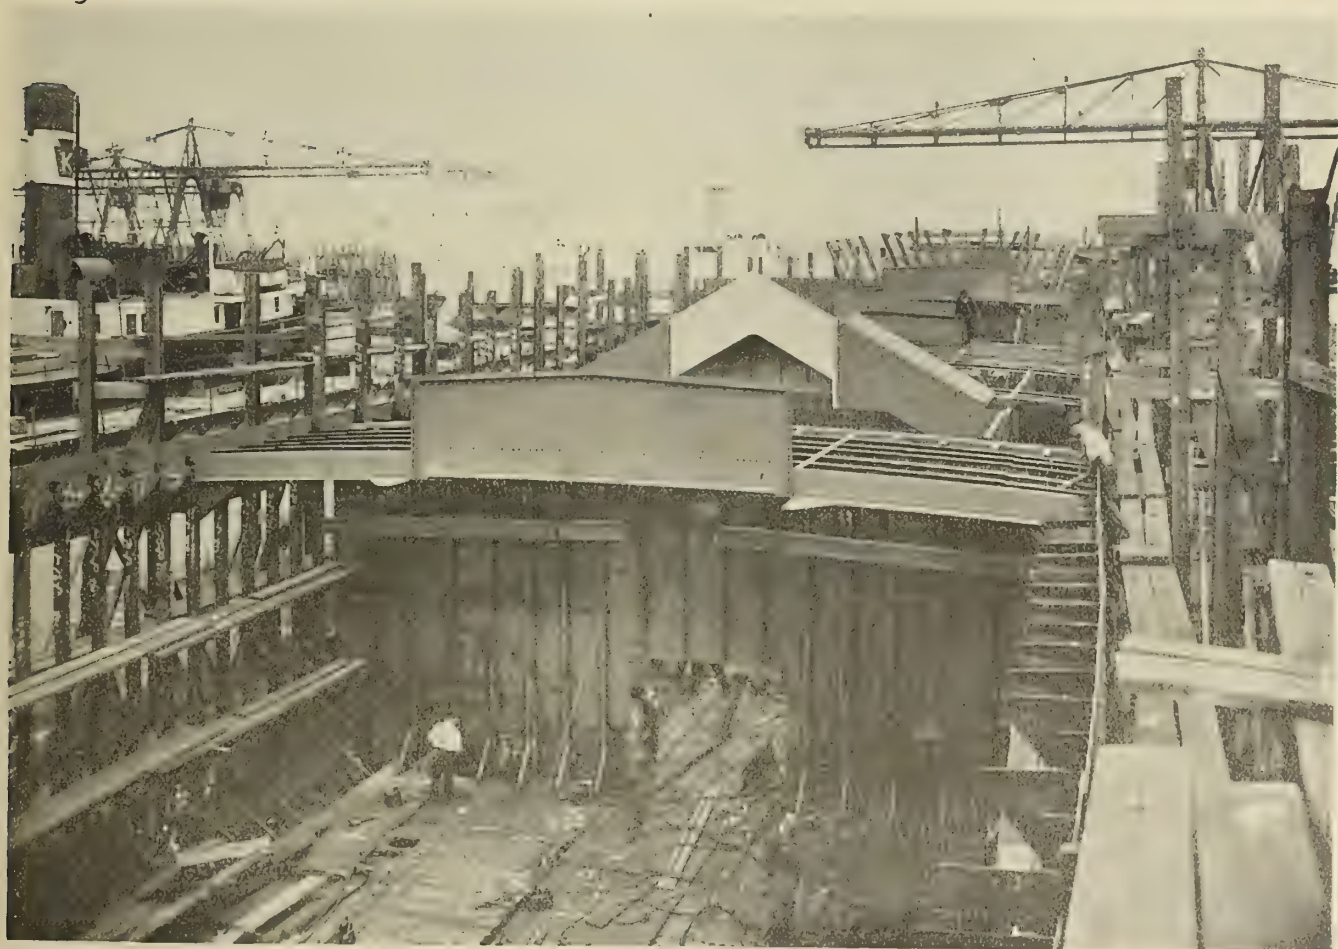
Side Plating and Deck Beams Being Bolted Up
